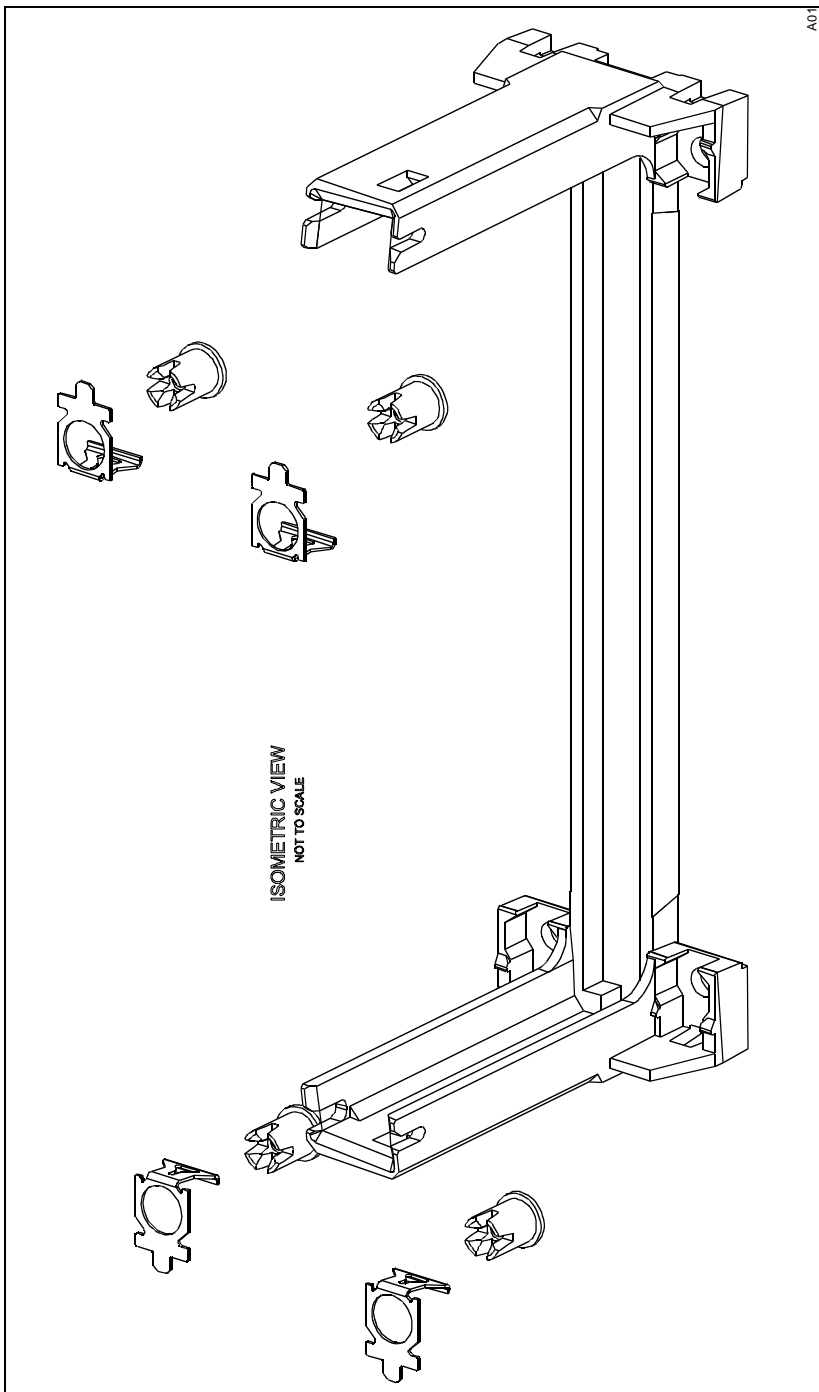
Retention Mechanism, Clip, and Captured Nut – Exploded View
